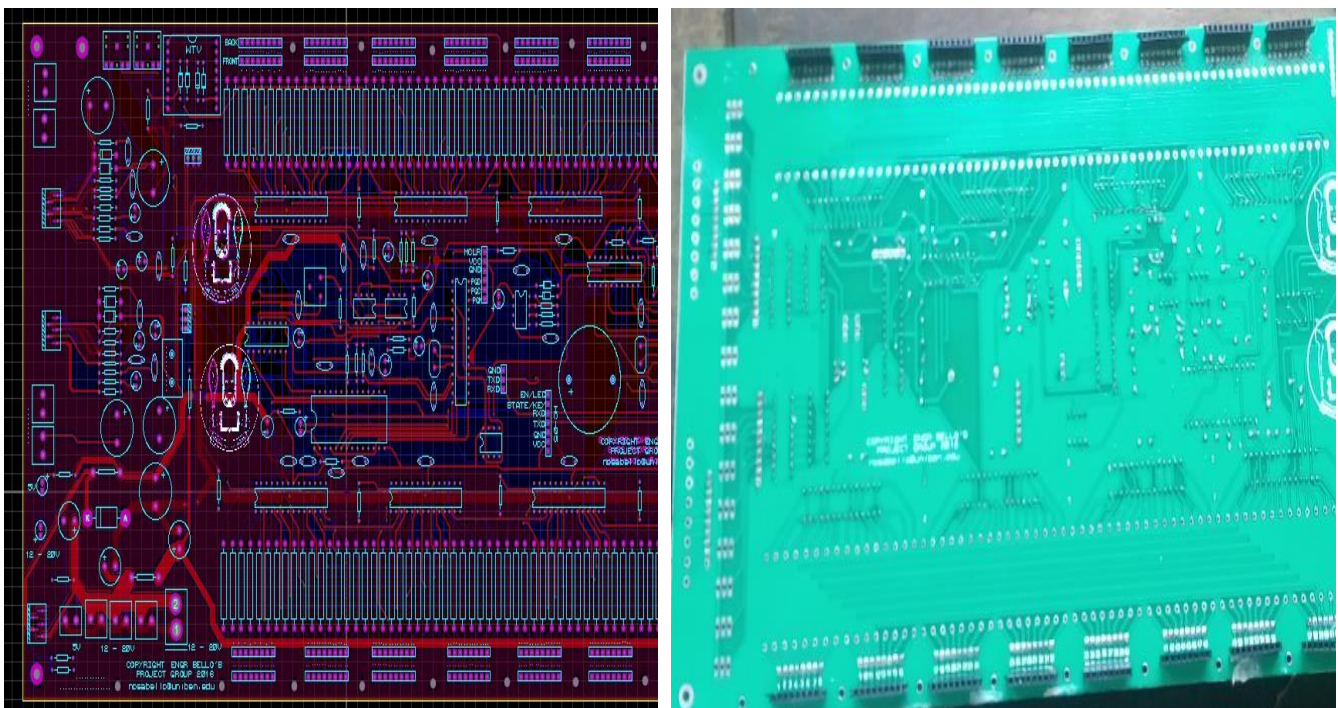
(a) Controller board printed circuit board design (b) Controller printed circuit board
